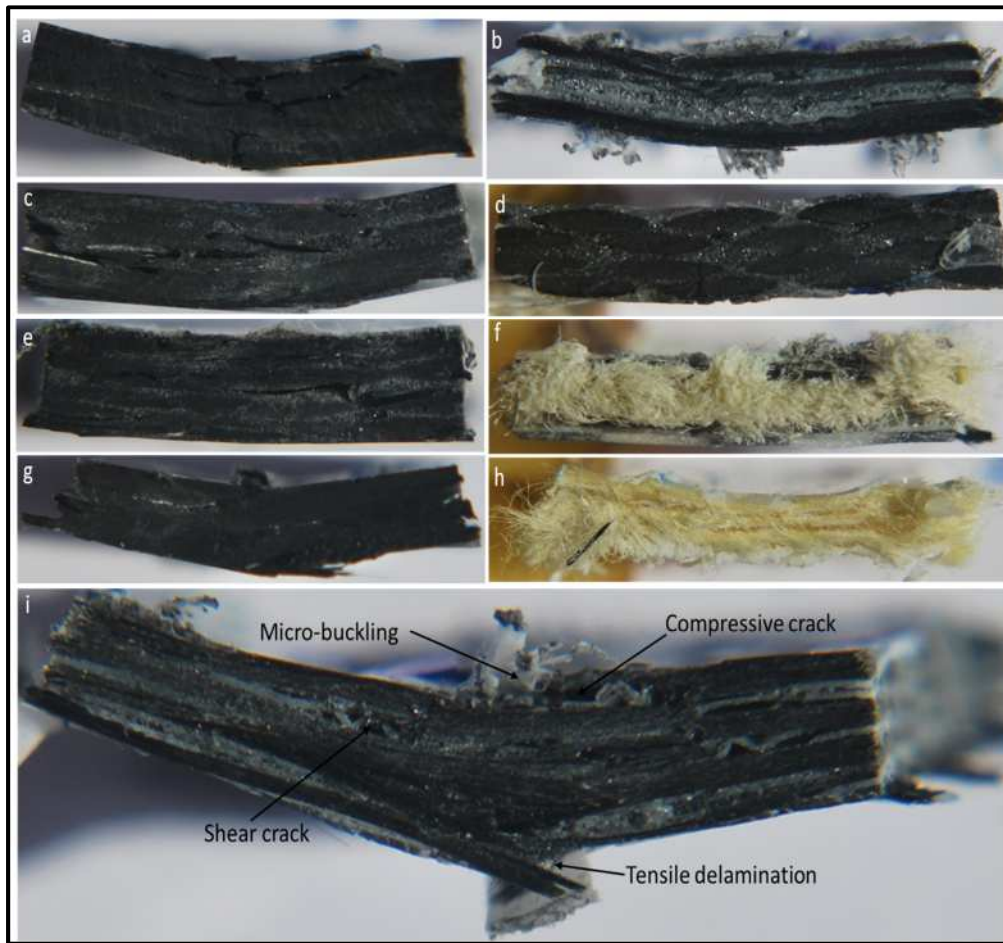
Optical images of the fracture surface of composites after flexural test: (a) CC1(b) CH1/T (c) CC2/T (d)CH1(e) CC3/T (f)CK (g)CC4 (h)KH1(i)CH2
